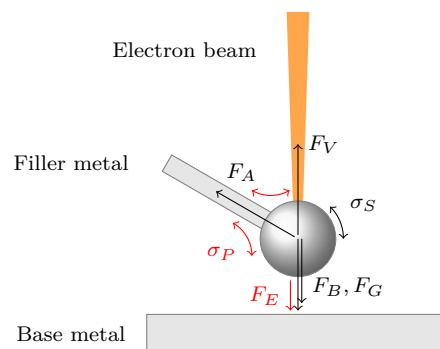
Forces on a welding droplet in electron beam welding [121] and the missing forces compared to arc welding marked in red
